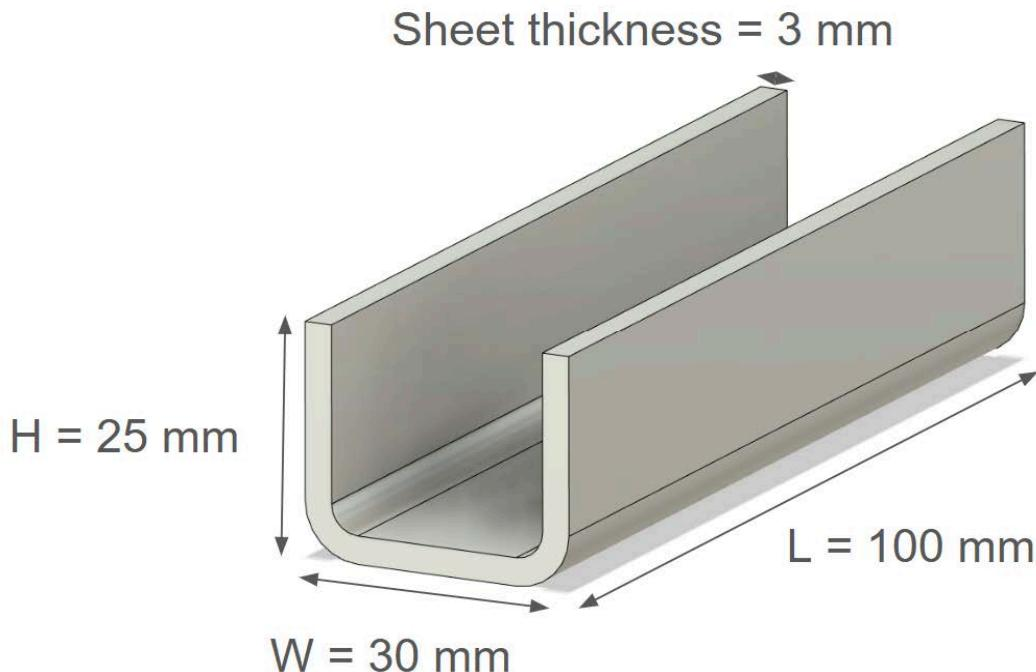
Bond arm made with sheet metal stamping and bending showing the desired part dimensions.
